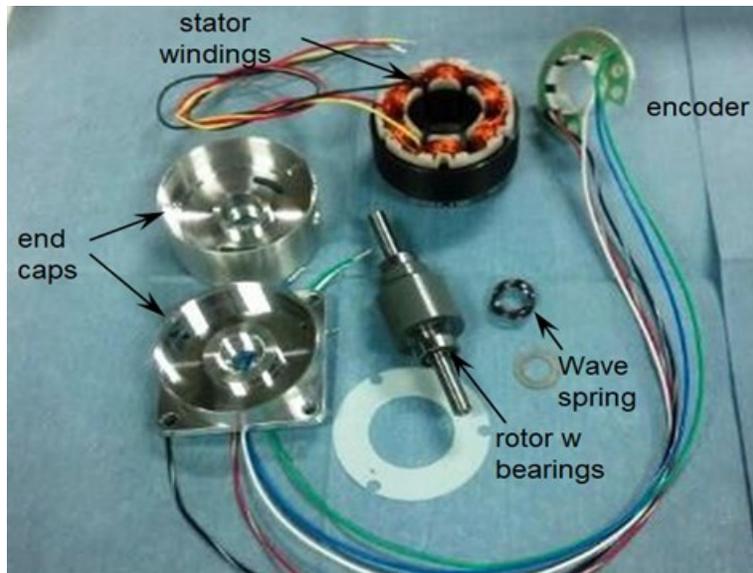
Test motor showing component parts (strip heaters and bearings not shown).
